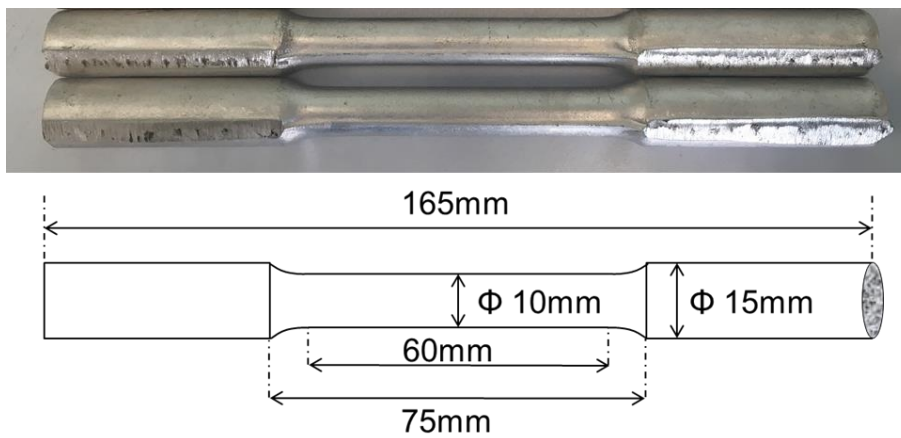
Tensile test samples and a schematic illustration showing the dimensions (in millimetres).
